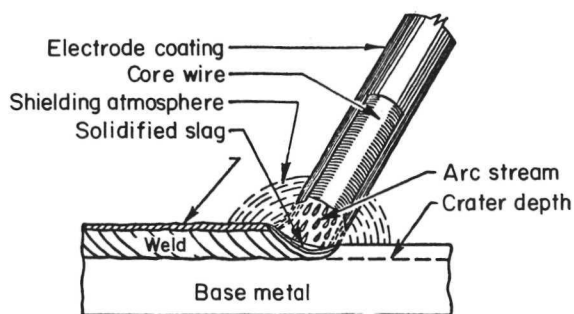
The shielded-metal-arc-welding process.
